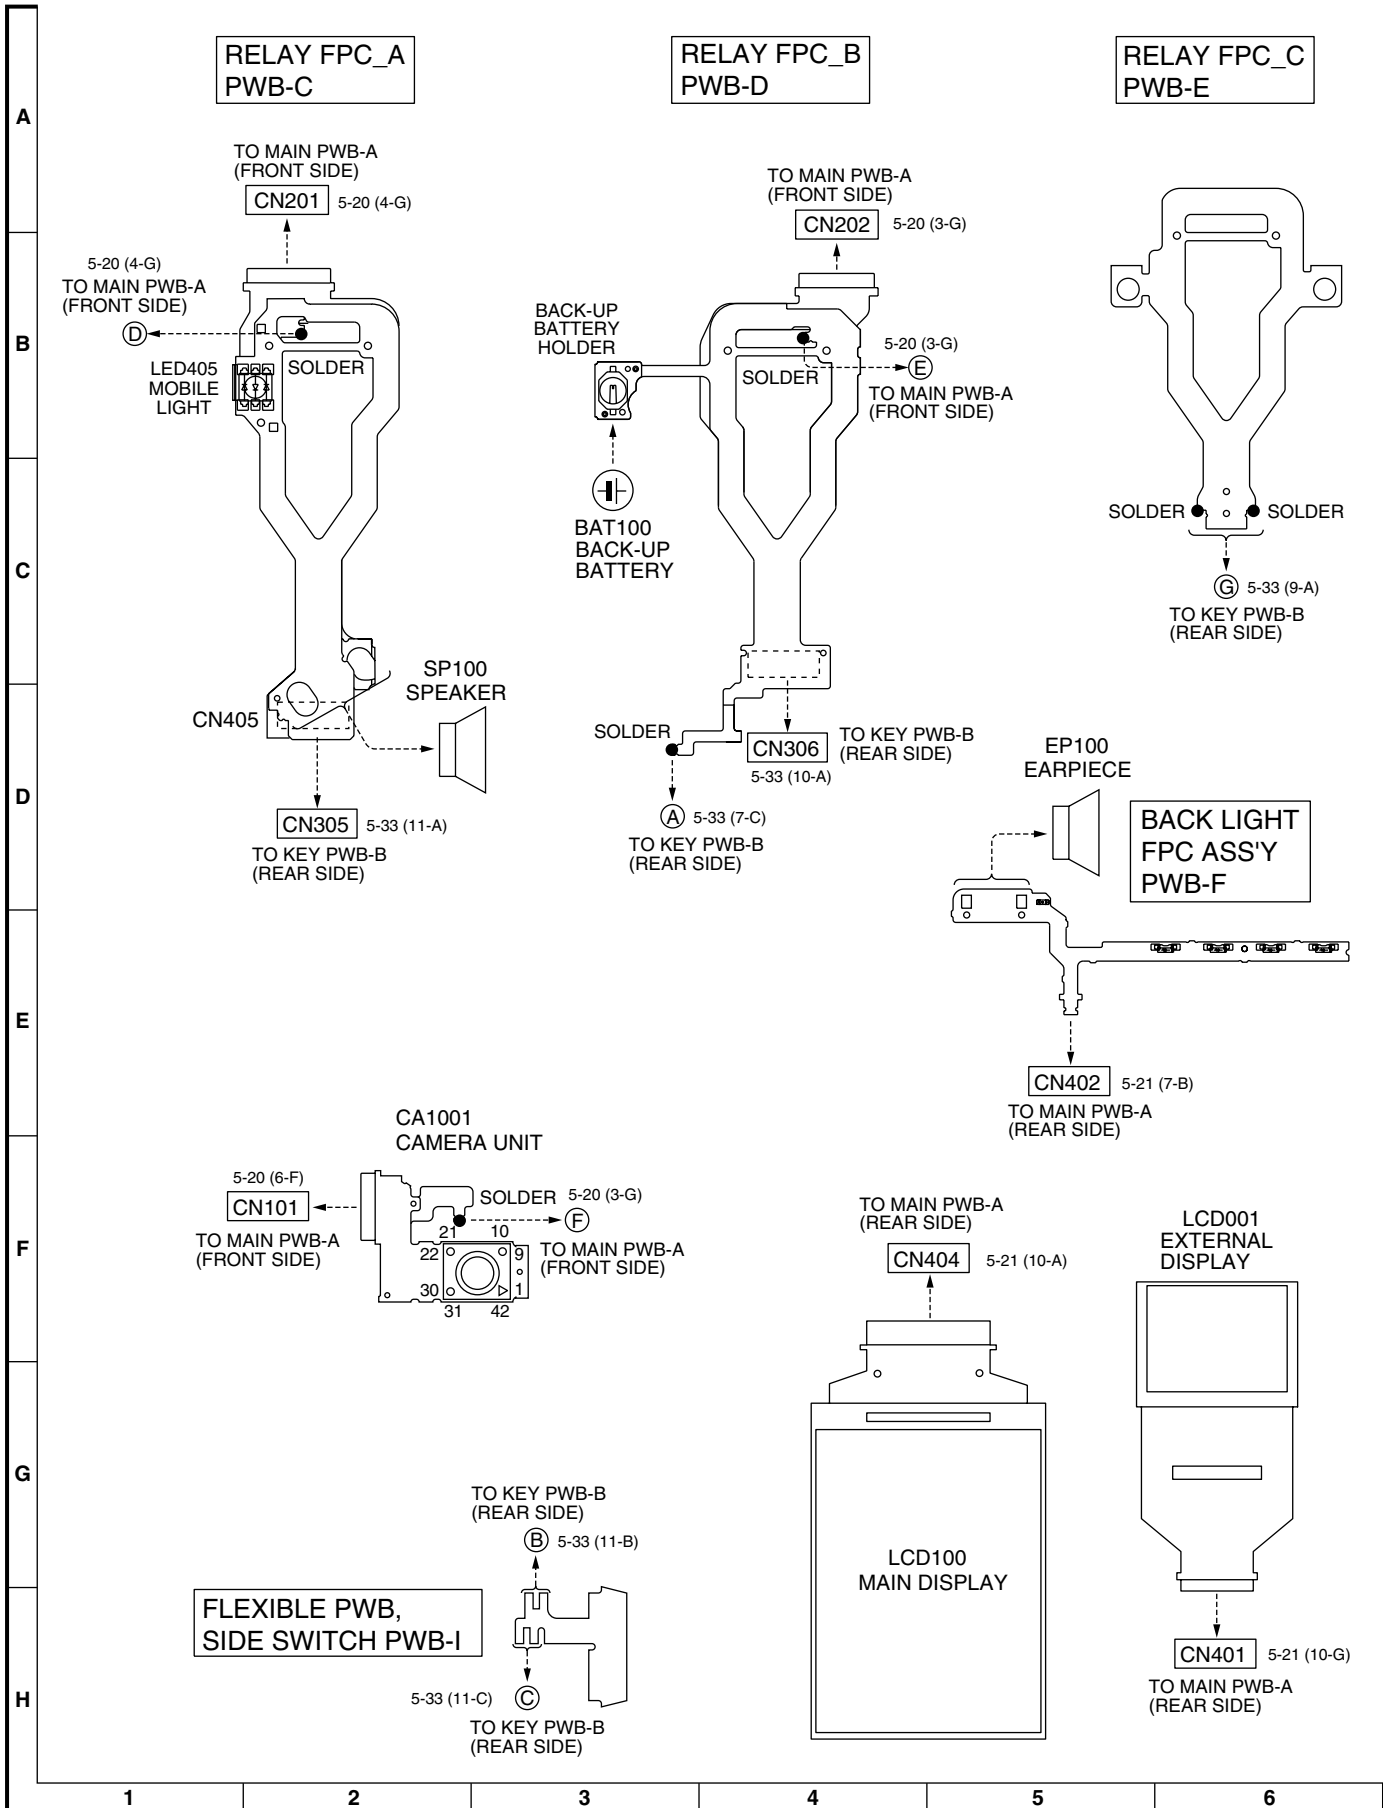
WIRING SIDE OF P.W.BOARD (5/5)
